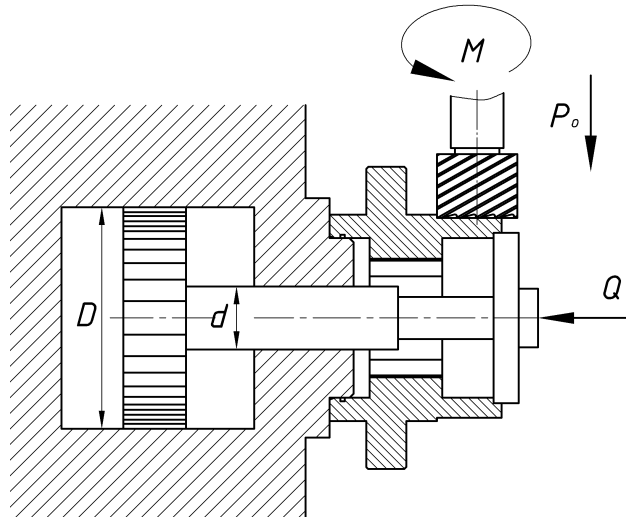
Scheme of basing and clamping the part in the milling device
